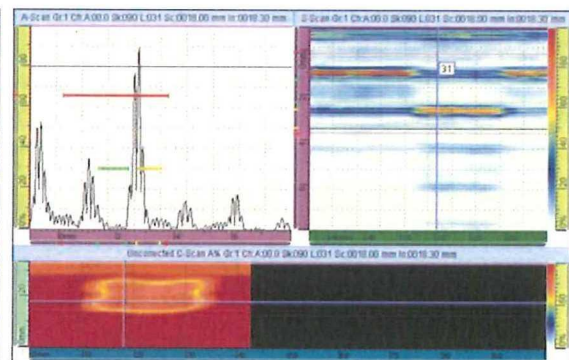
PA scan of USW140912-10 which is welded with 700 [J]. The A, S, and C-scan show that the two ED strips merged into a proper uniform weld.
